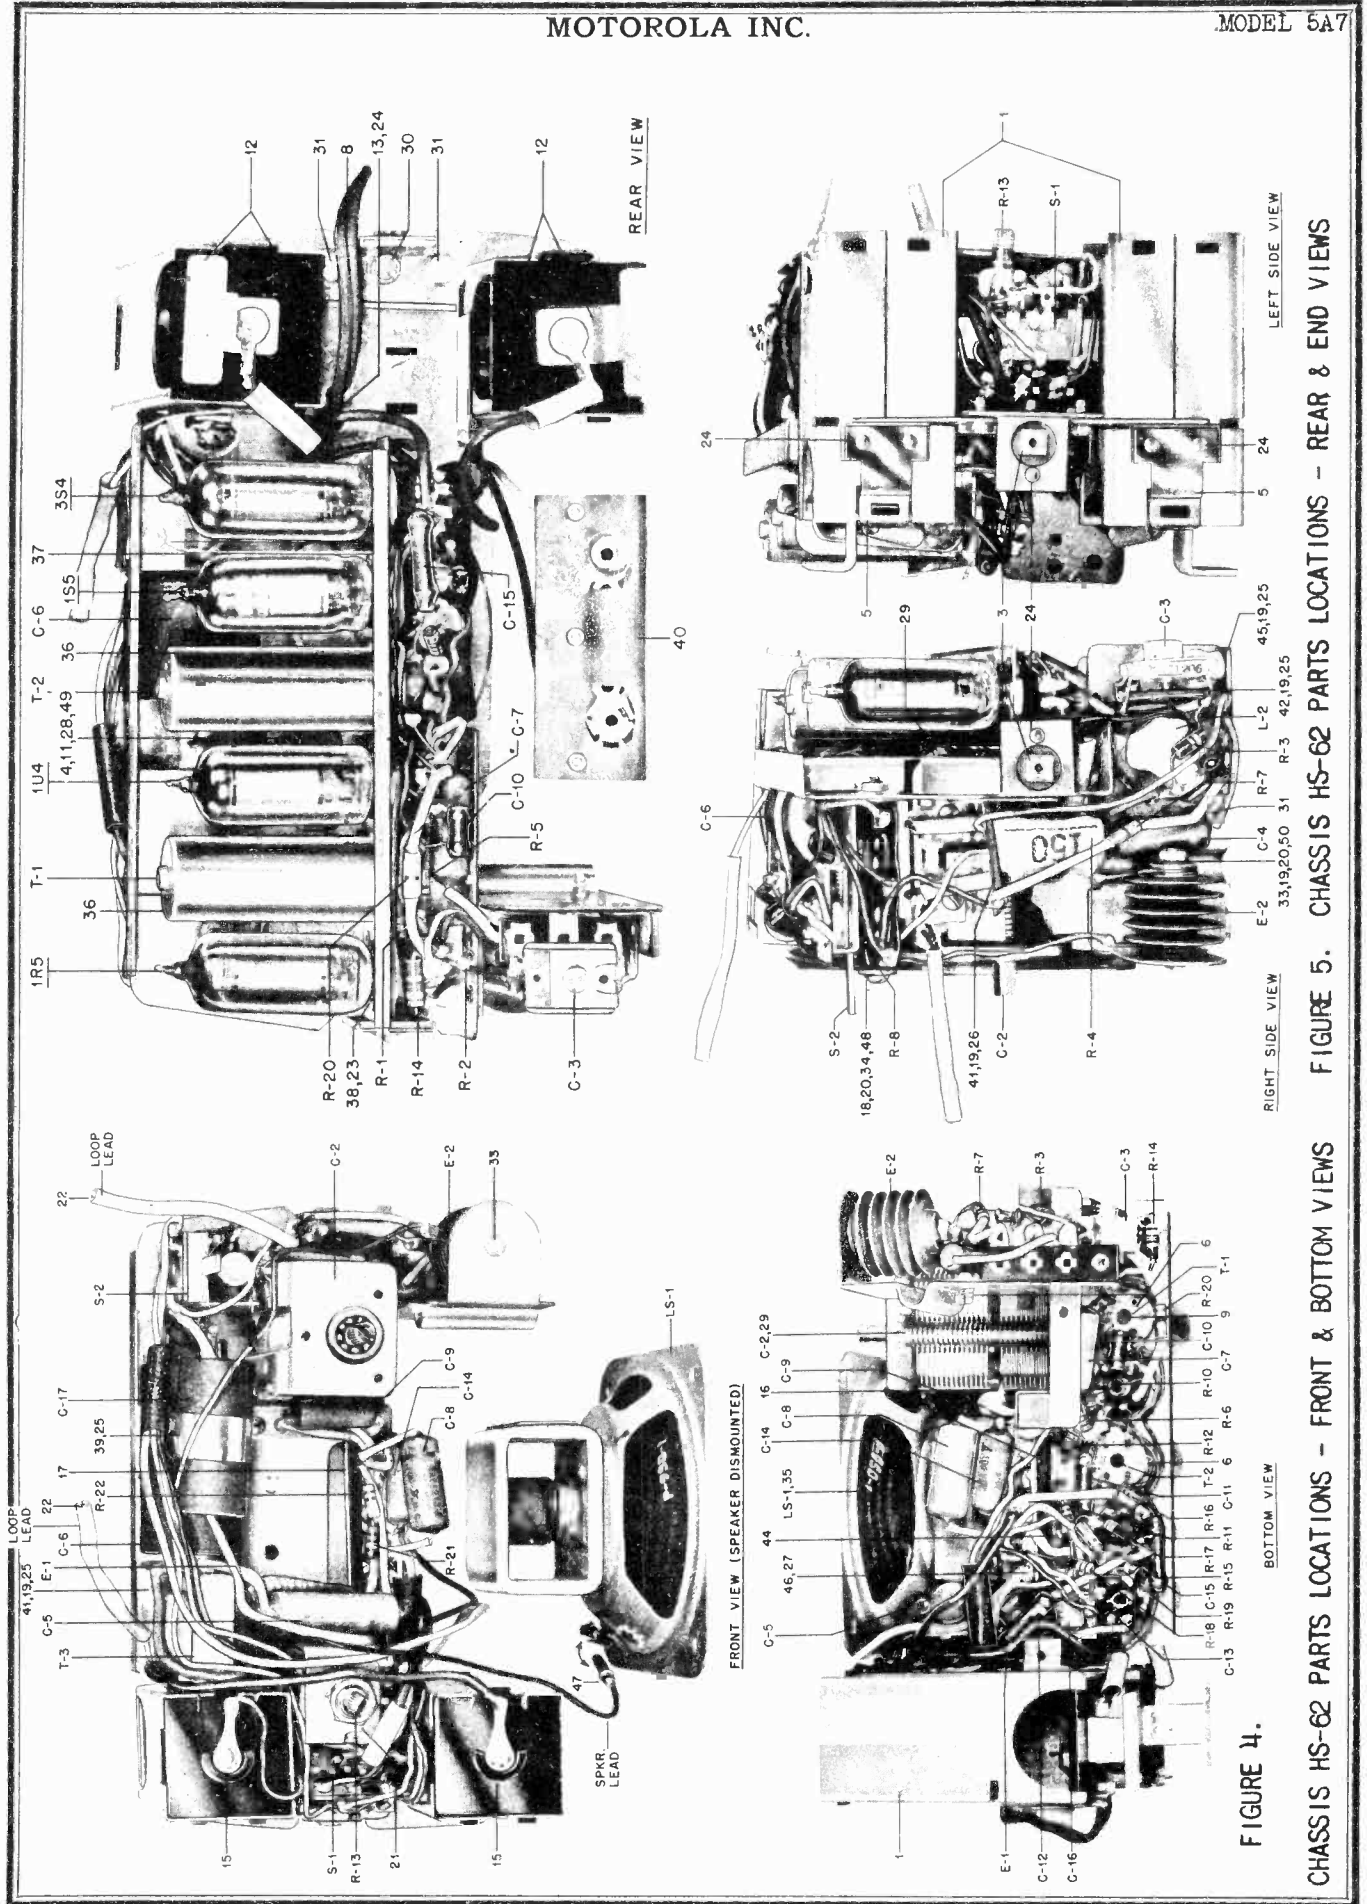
CHASSIS HS-62 PARTS LOCATIONS - FRONT & BOTTOM VIEWS
